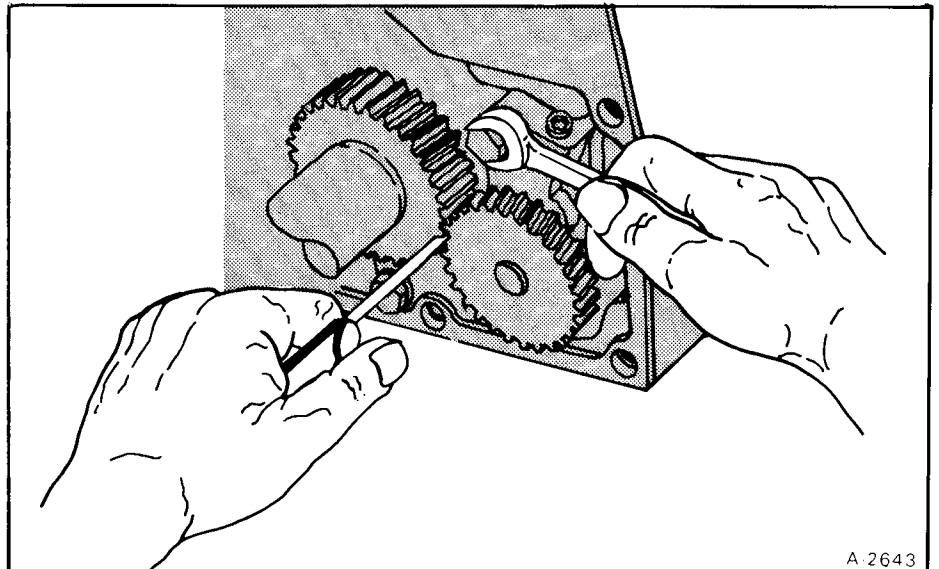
Adjusting Oil Pump Gear With Feeler Gauge
